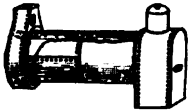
Explosion of the boiler of a traction engine from over-pressure.
